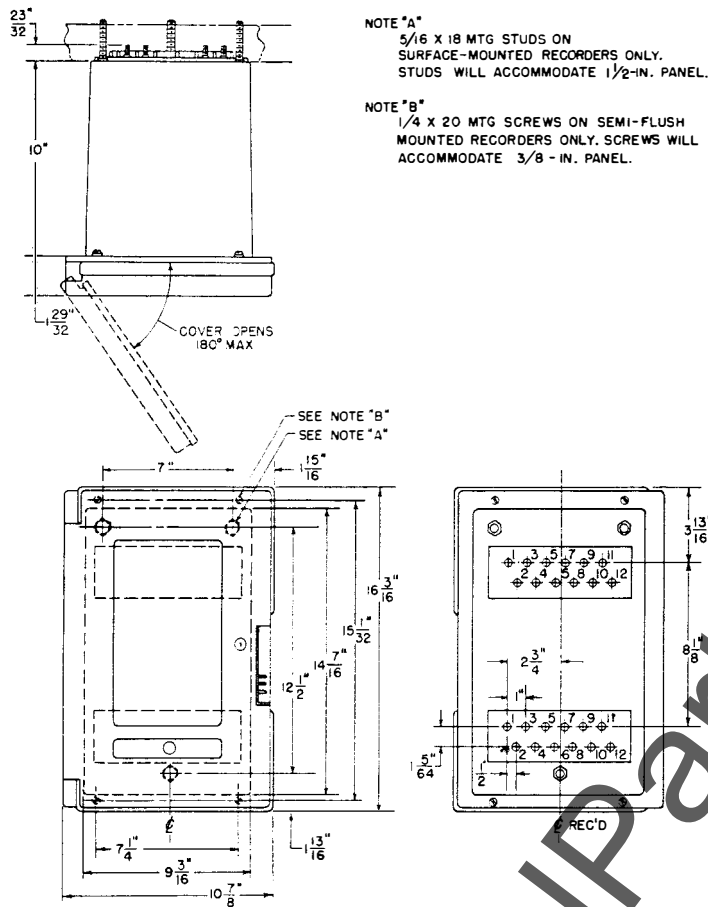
Outline and mounting dimensions of switchboard models (surface and semi-flush mounting)
